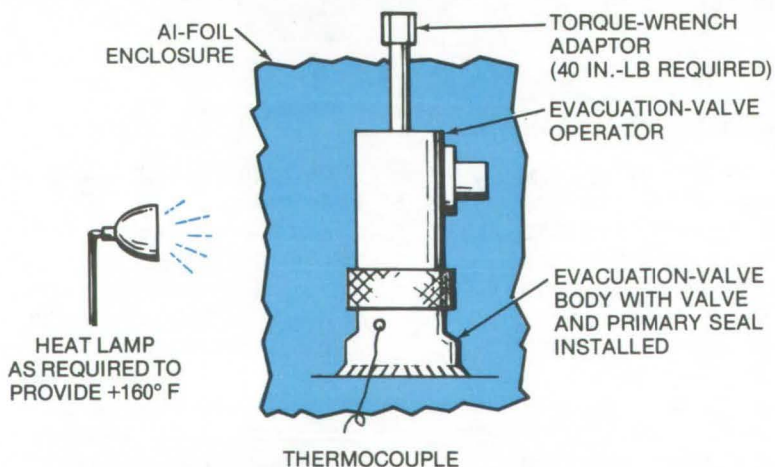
Hot-Formed O-Rings can be made with the apparatus shown. A thermocouple is used to control a lamp which, together with an aluminum-foil reflector, provides the heat. Mechanical force is applied with a torque wrench.
